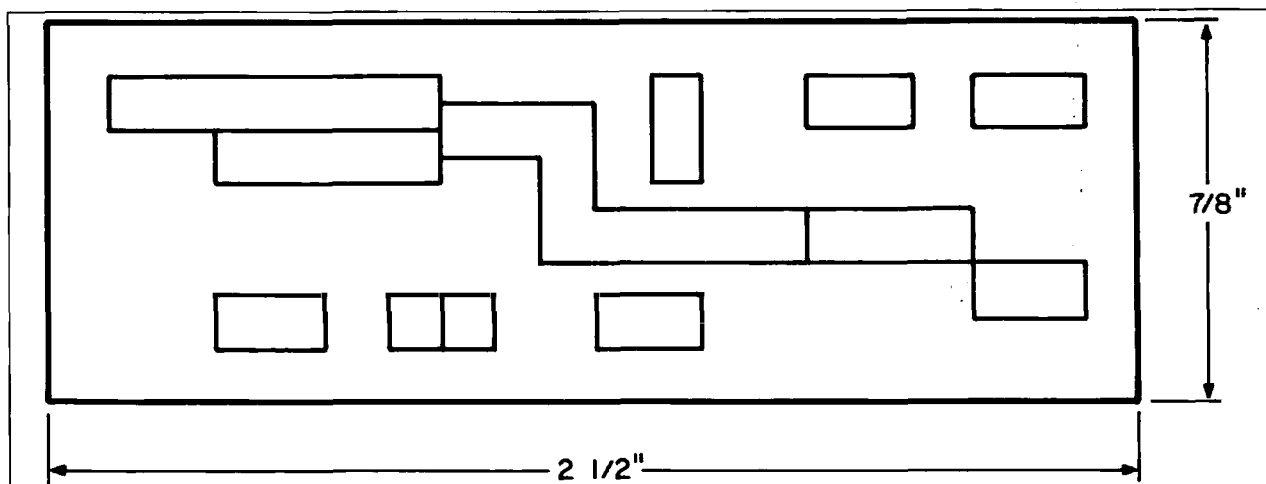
PC board foil diagram for the VCXO mod. The enclosed sections on the board are foil. Score between the sections with an X-acto knife.
